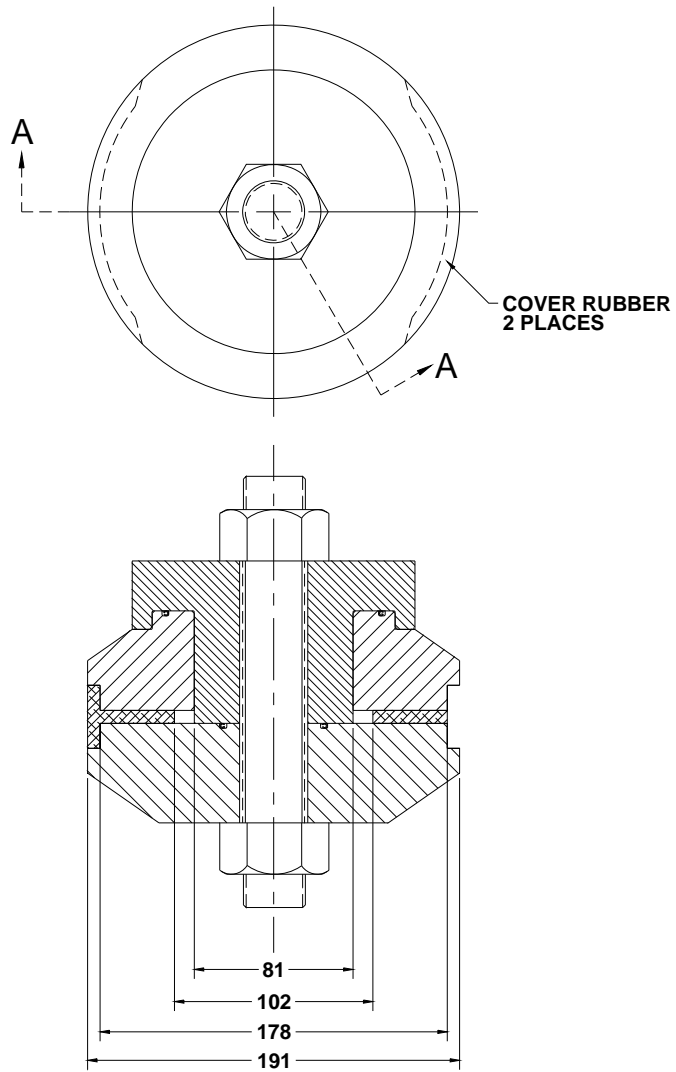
Small-Scale Test Specimen Assembly (mm)
